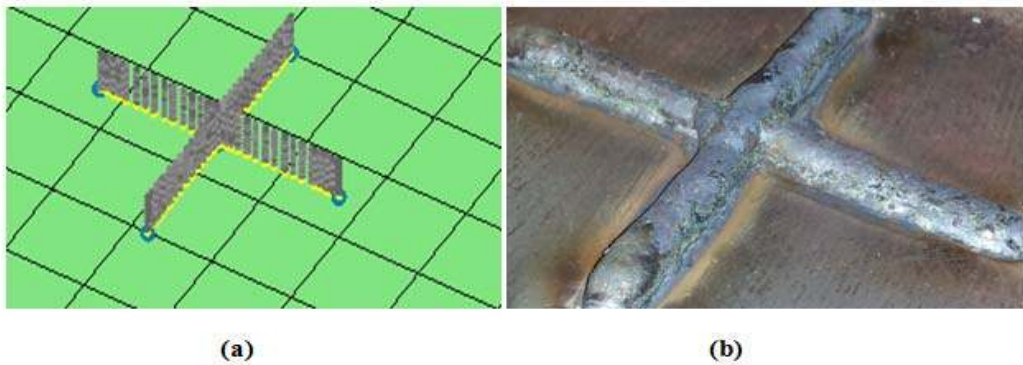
20. Examples of crossing wall feature produced using the continuous ignition arc, (a) CAD drawing; (b) deposited part
